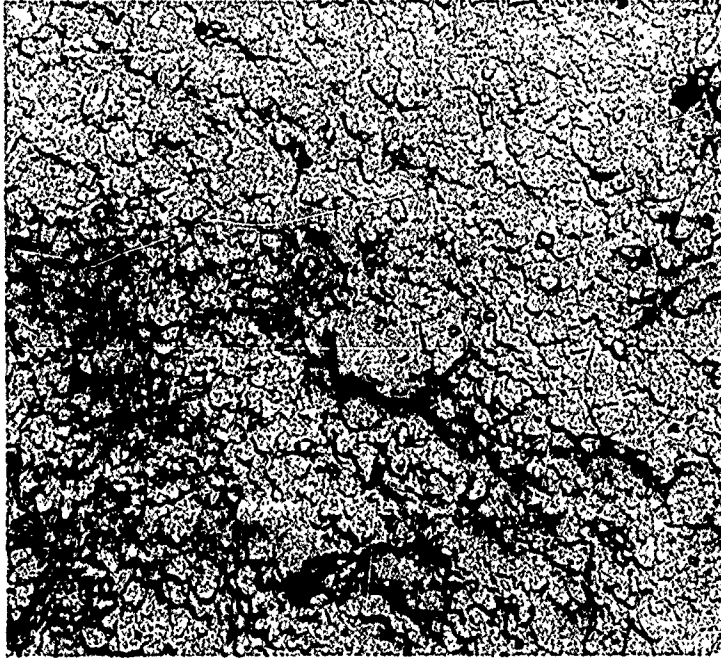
Appearance of the Fast Fracture Zone on Ti-Cad Specimen No. 1.
